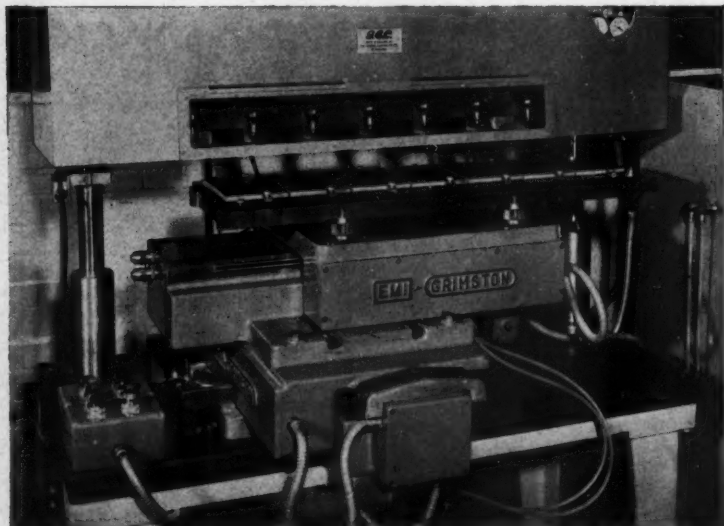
This special drilling machine for printed circuit boards, which was constructed by the G.E.C. Telephone Works, incorporates an E.M.I. Grimston tape-controlled positioning table
